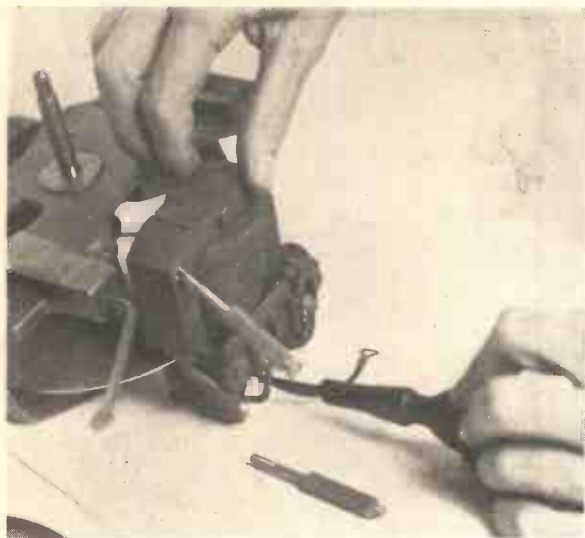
REMOVING THE MAGNET UNIT OF TYPE 91 MOTOR.
